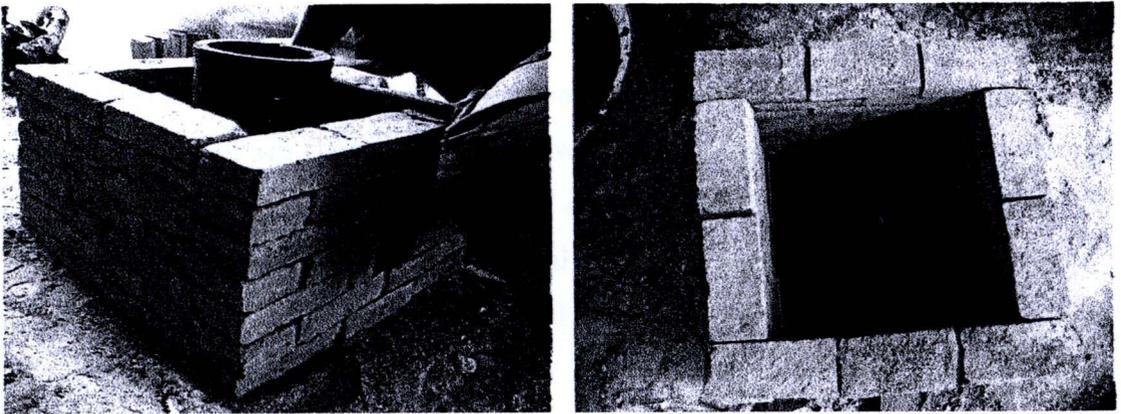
Making brick furnace with air hole at the bottom to melt bronze.
